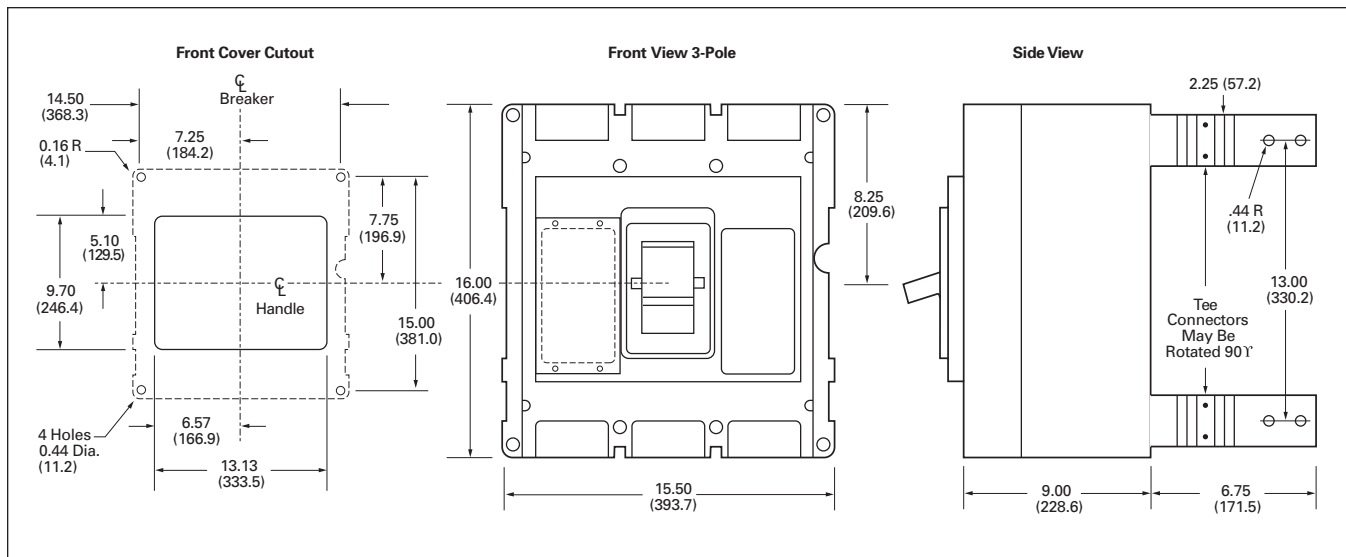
RG-Frame — Dimensions in Inches (mm)
